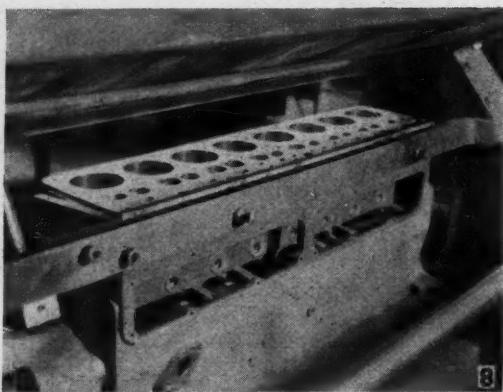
View of the bearing-assembling machine from the rear, showing block in position and bearings ready to be pressed in.
